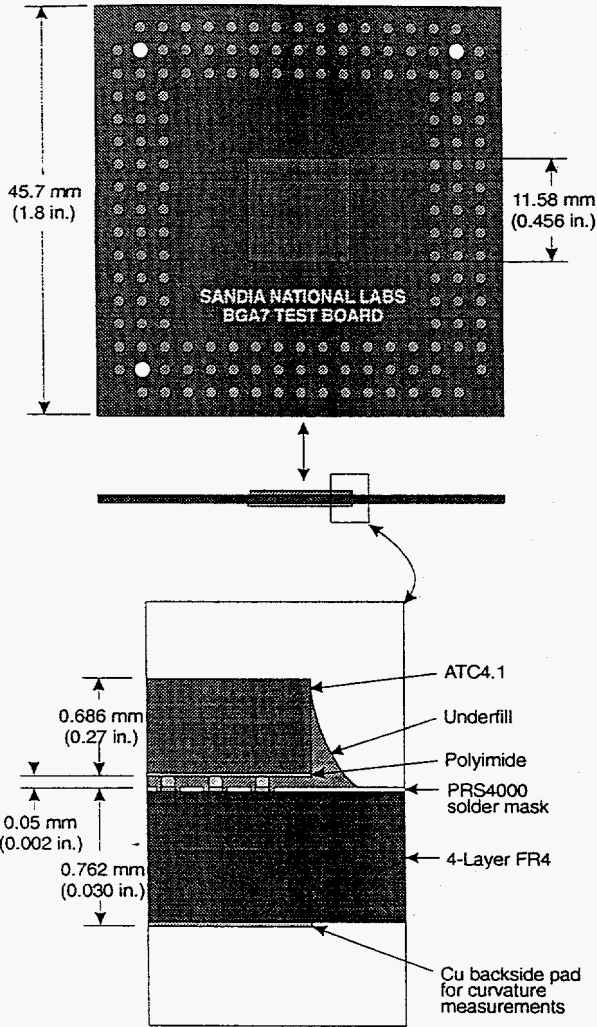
Construction details of ATC4.1 QUAD flip-chip assembled on FR-4 test board.
